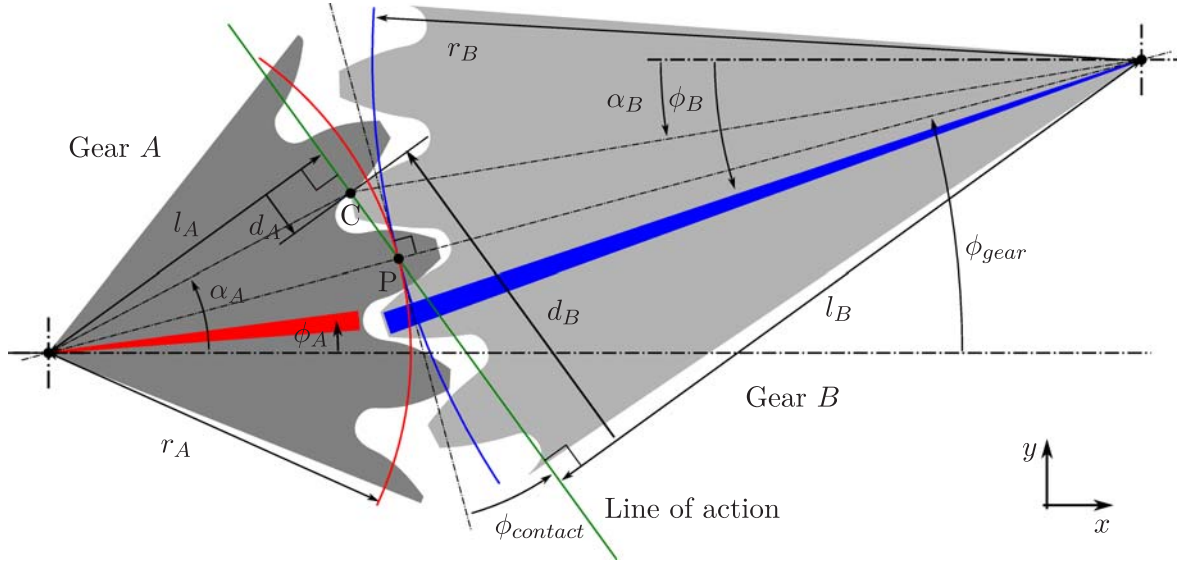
Schematic overview of two involute gears in contact. The blue and red triangles are fixed markers on the gear wheels. In the figure $\omega_A < 0$ and Gear A drives gear B.
